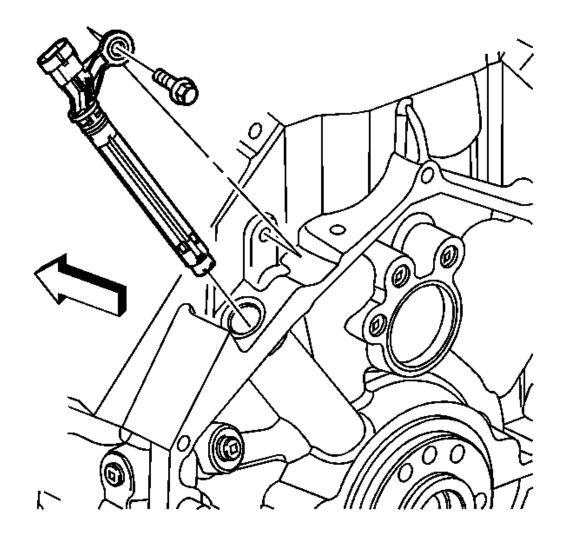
View Of CKP Sensor & Bolt Courtesy of GENERAL MOTORS CORP.
